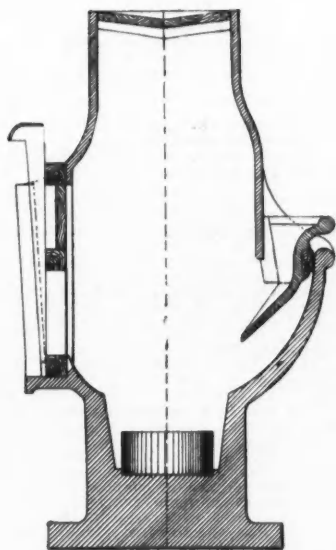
BOLTHOFF'S STAMP MILL MORTAR.
